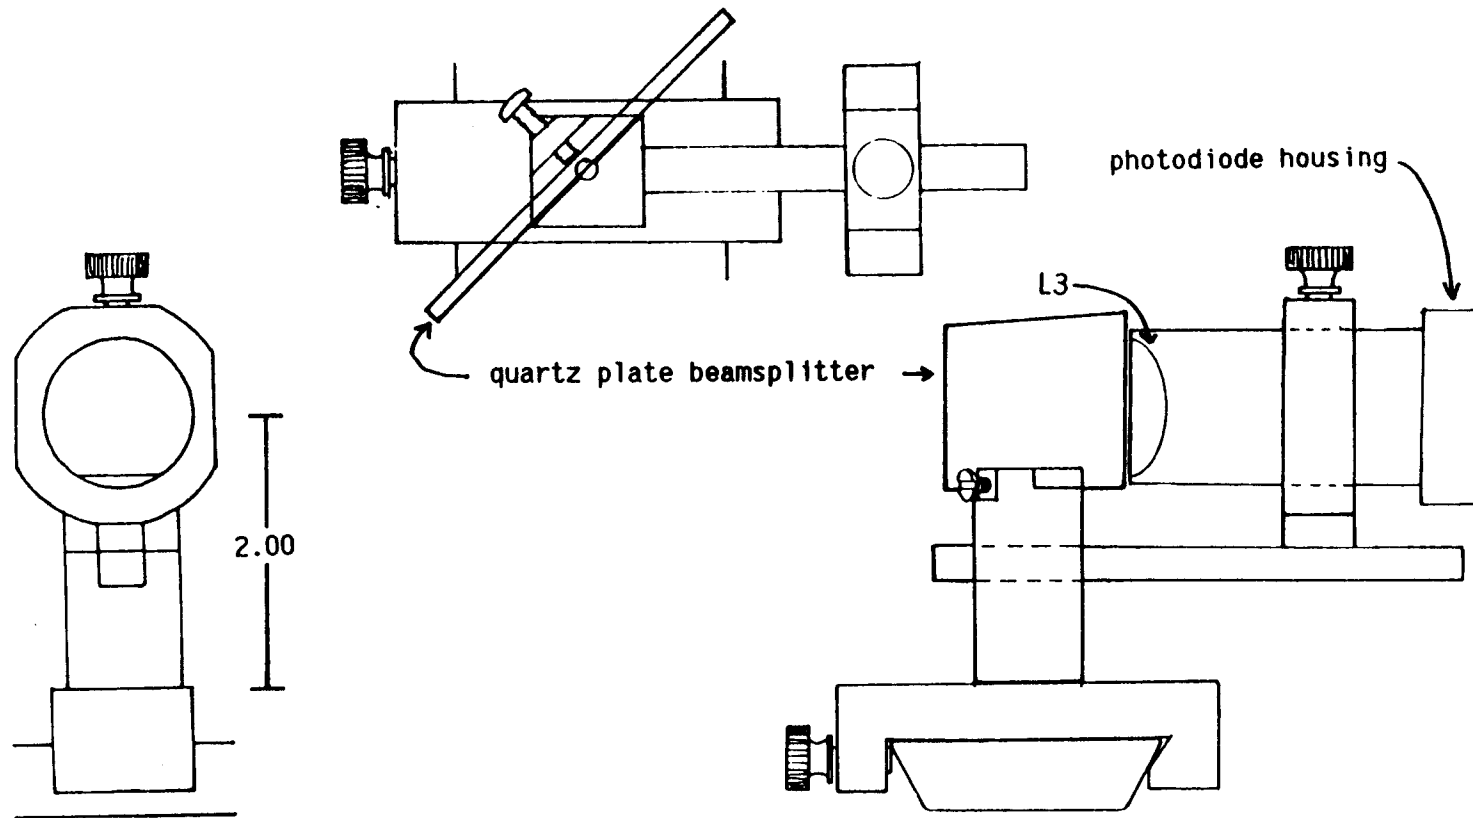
Detailed drawing showing the optical cart holding the reference detector housing and the quartz plate beamsplitter. All dimensions are in inches.
